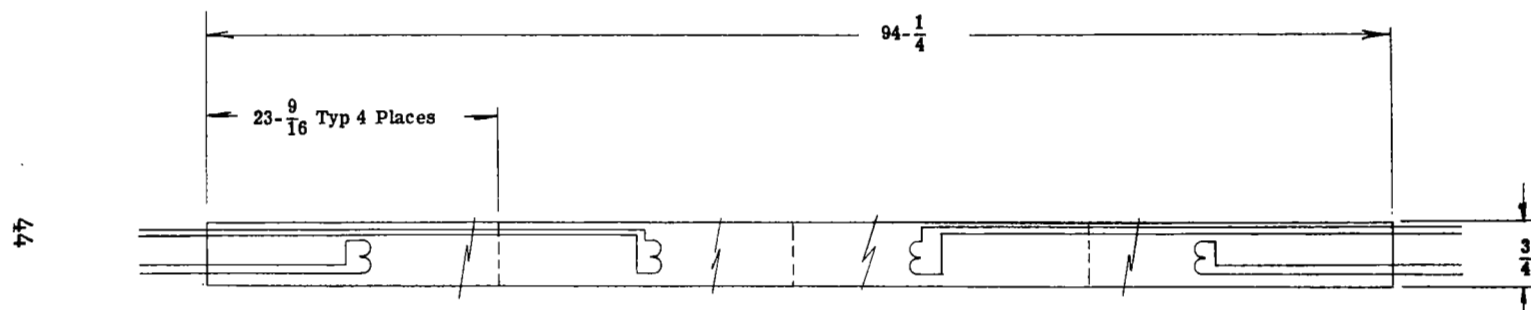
Circumference Heater Blanket - Deformable Mirror
